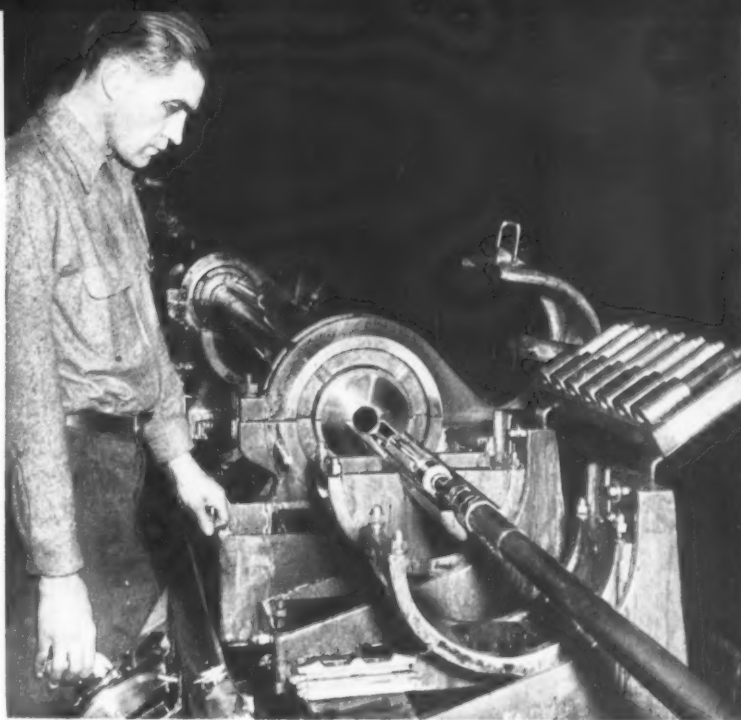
Honing a Gun Bore to the High Degree of Finish and Close Dimensional Accuracy Required before Rifling can be Performed
